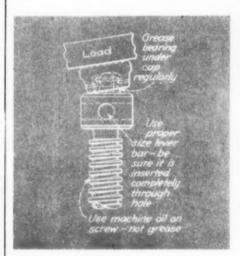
MACHINE OIL, not grease, should be used in lubricating threads of screw jacks. Bearing under cap ought to be lubricated with grease. When screw is to be turned, operator should insert lever bar of correct size completely through hole.
